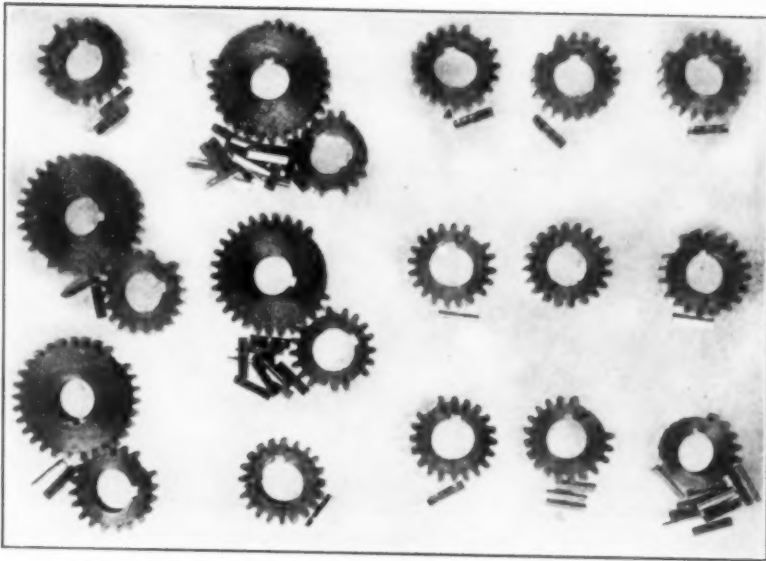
20 TOOTH ENGAGING 30 TOOTH, TESTS 1—17 INCLUSIVE, SERIES 2
